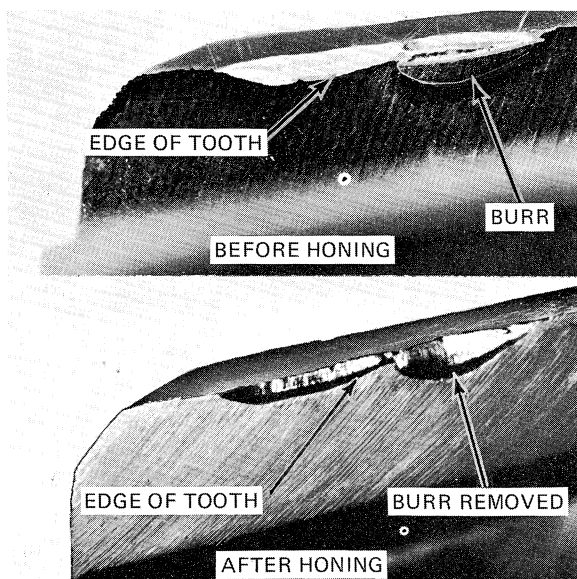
Removal of nicks from gear teeth by the gear honing process.
